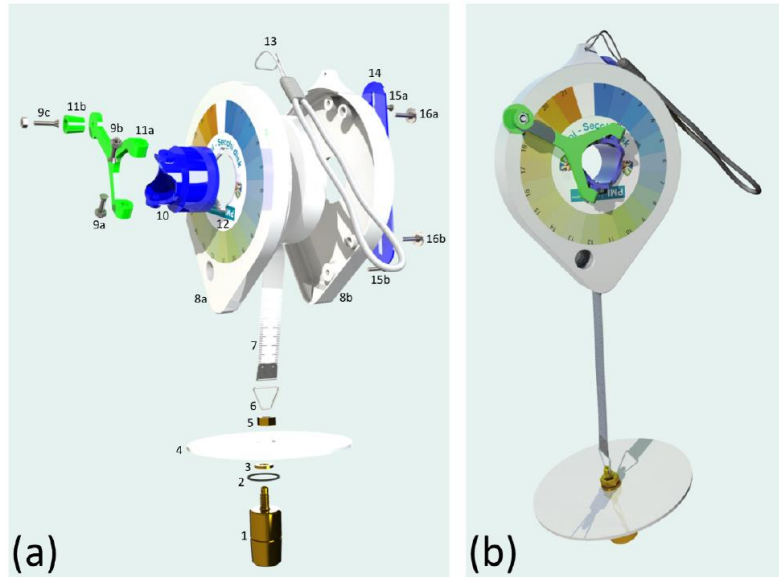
An exploded drawing (a) and rendering (b) of the mini-Secchi disk. Numbers refer to components as follows: 1. Weight; 2. Weight O-ring; 3. Weight washer; 4. Secchi disk; 5. Weight bolt nut; 6. Weight attachment circlip; 7. Tape measure; 8a,b. Mini-Secchi casing; 9a,b,c. Fixings; 10. Bobbin; 11a,b. Handle; 12. Colour scale; 13. Lanyard; 14. Finger strap; 15a,b, and 16a,b Fixings.
